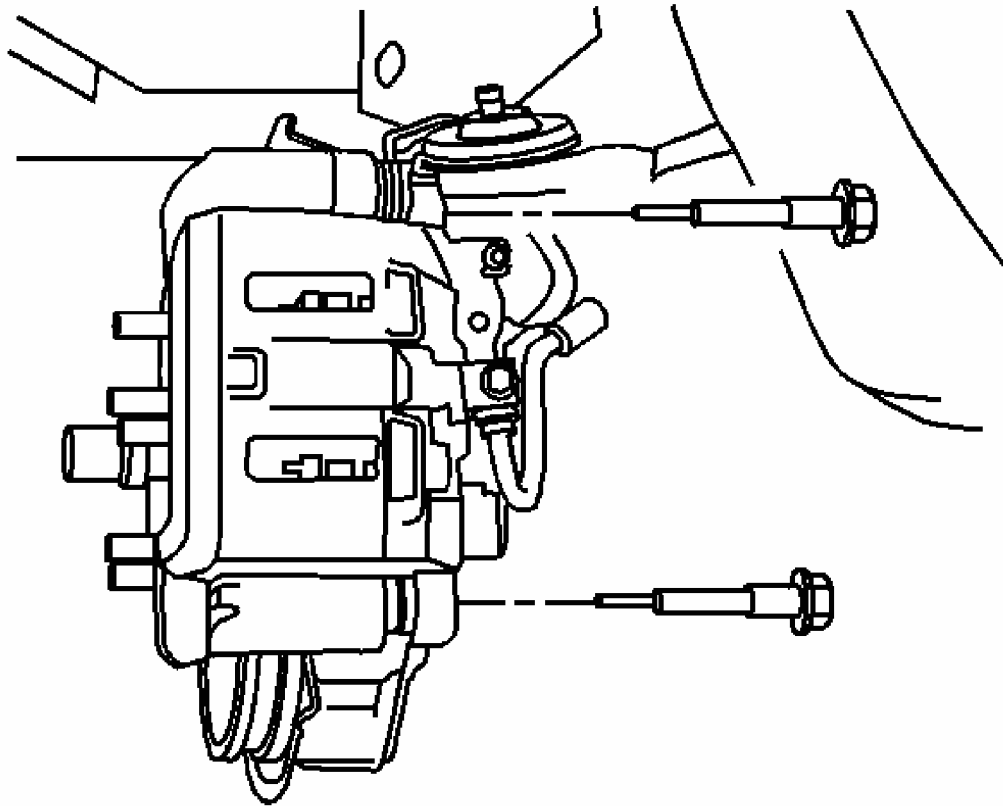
View Of Brake Caliper Guide Pin Bolts
